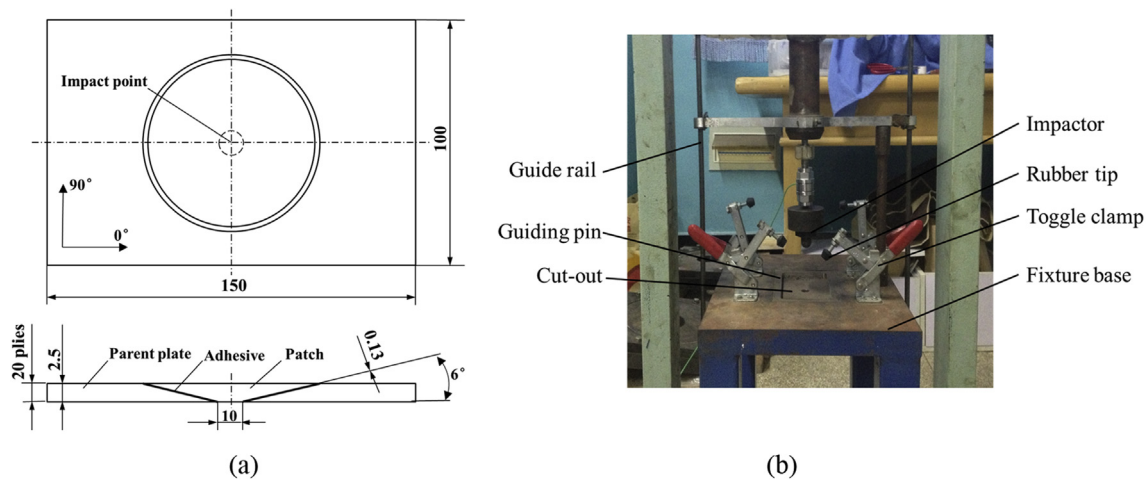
Specimen and impact fixture. (a) configuration of scarf repaired specimen, (b) impact test fixture.
